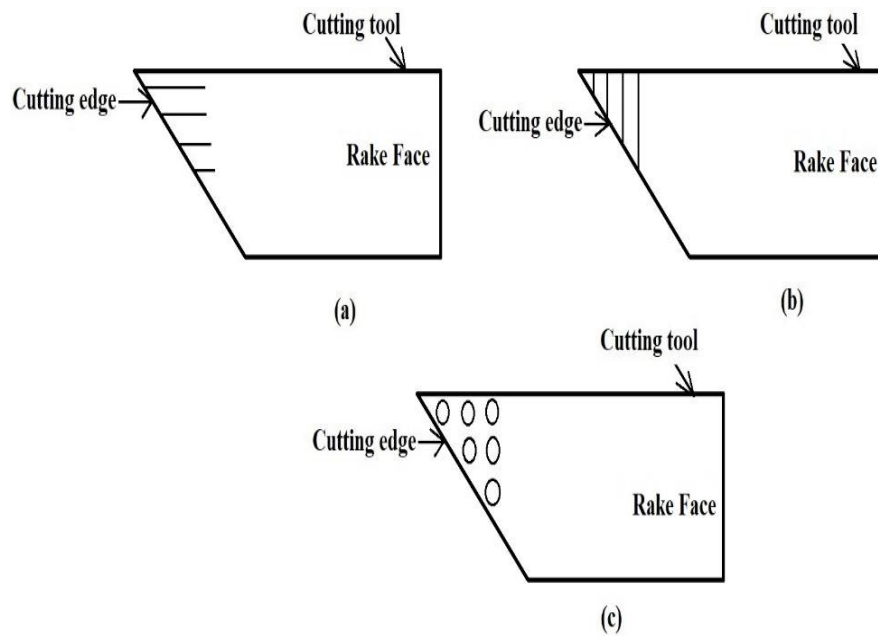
Different types of texture patterns made at rake face of cutting tool (a) parallel to cutting edge; (b) perpendicular to cutting edge;(c) dot pattern
